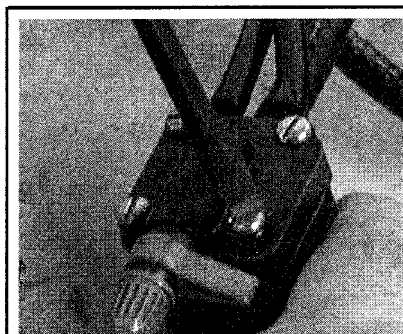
If overhaul is necessary, remove the 4 solenoid cover screws...
